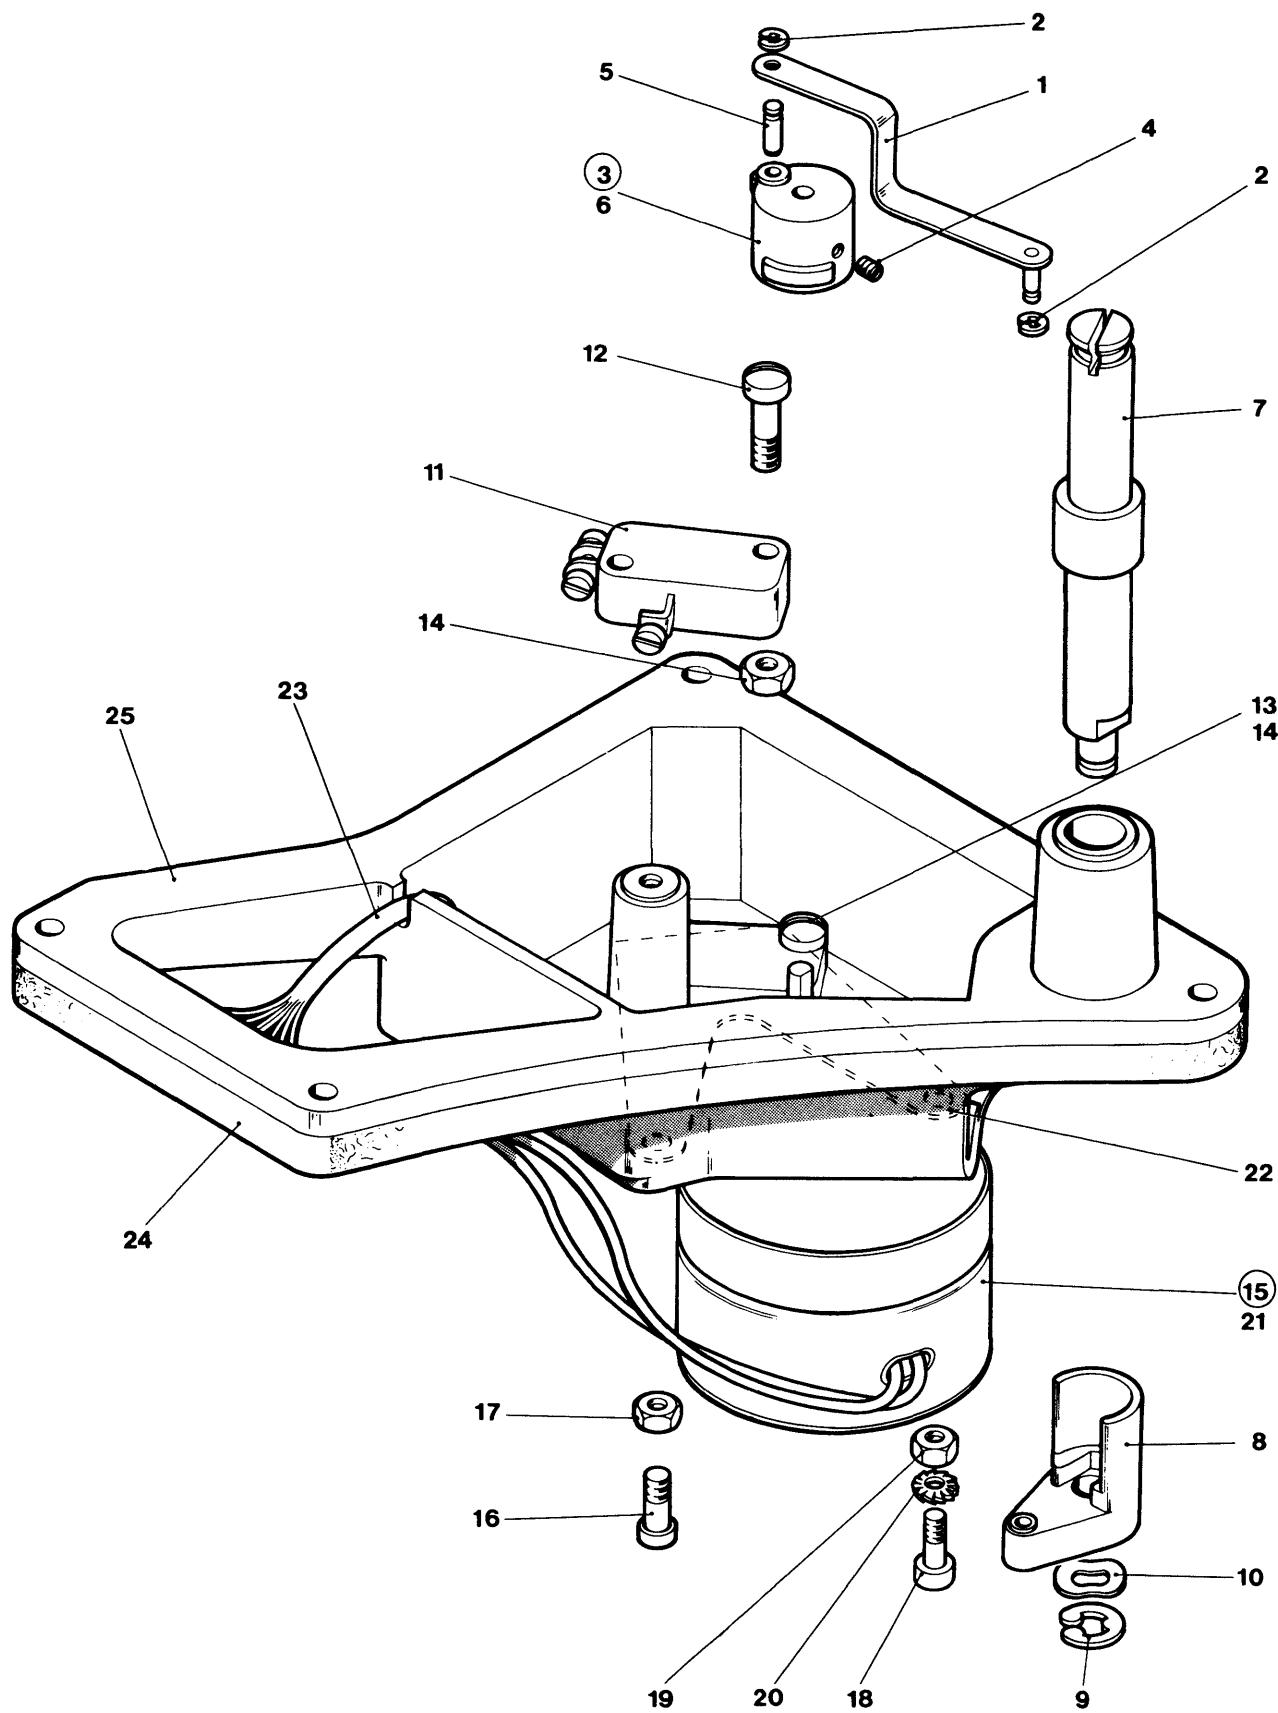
B. BRUSH DRIVE ASSEMBLY - 60HZ
